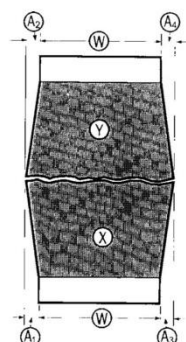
Halves of Broken Charpy V-Notch Impact Specimen Illustrating the Measurement of Lateral Expansion, Dimensions A_1 , A_2 , A_3 , A_4 and Original Width, Dimension W
